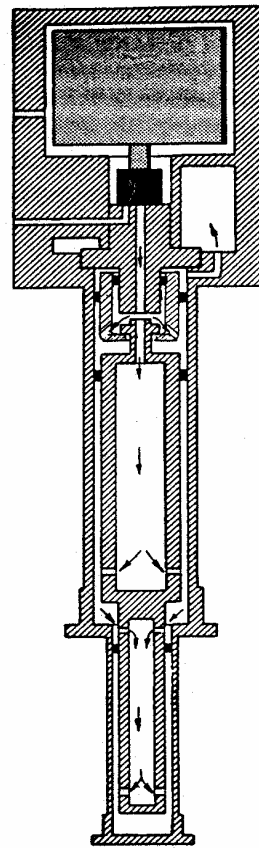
Cold Head Valve Closed, Displacer Moving Up
